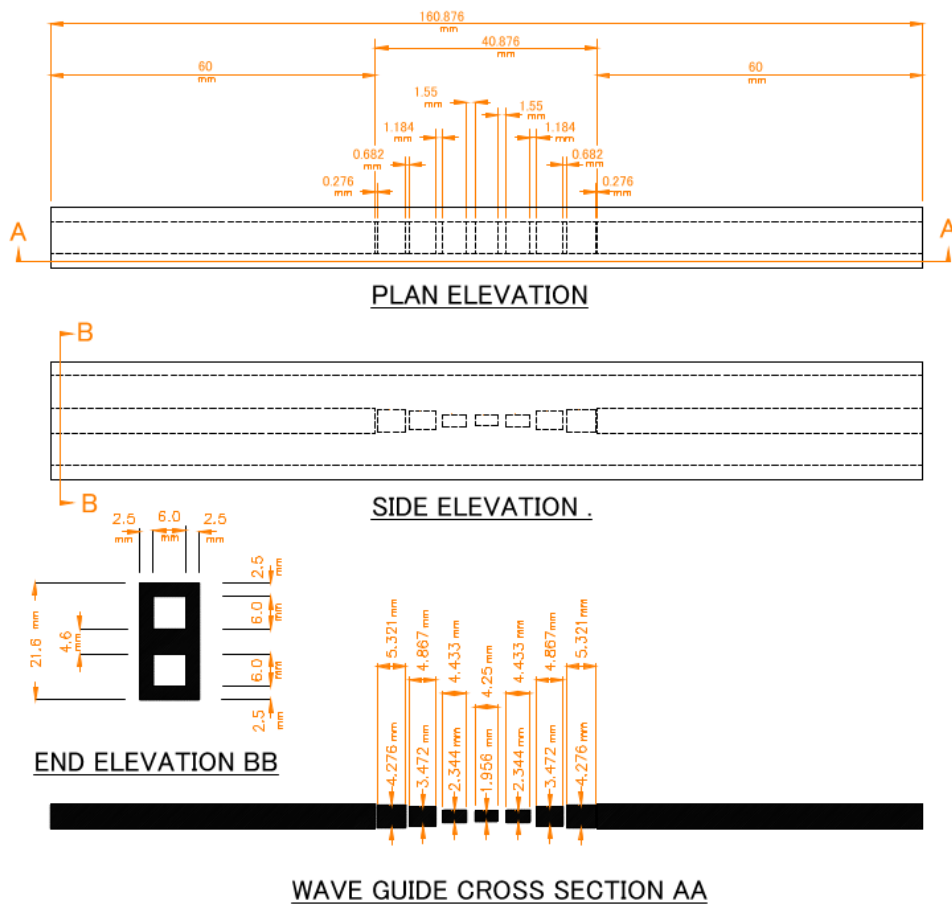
Plan, side and cross sectional elevations of the acoustic directional coupler as drawn in AutoCAD.
